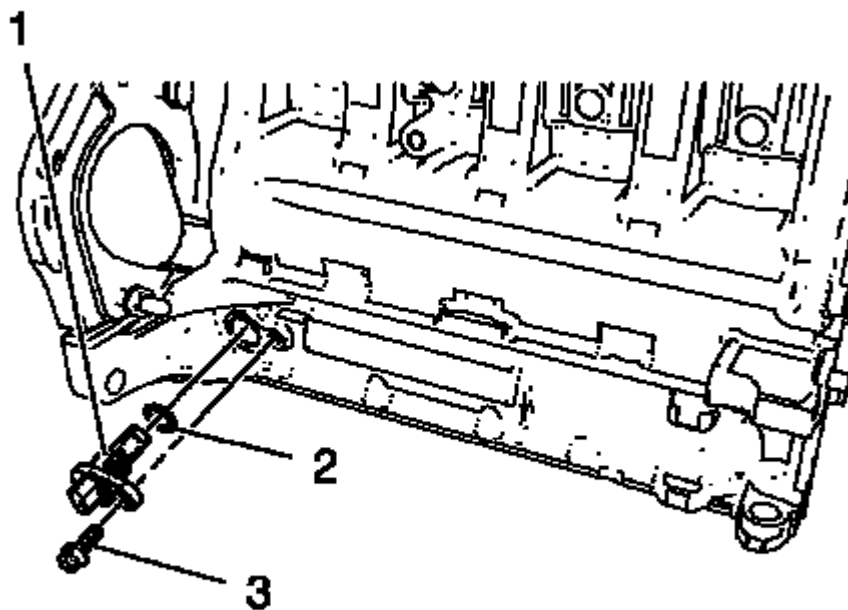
Crankshaft Position Sensor, Bolt And Seal Ring
